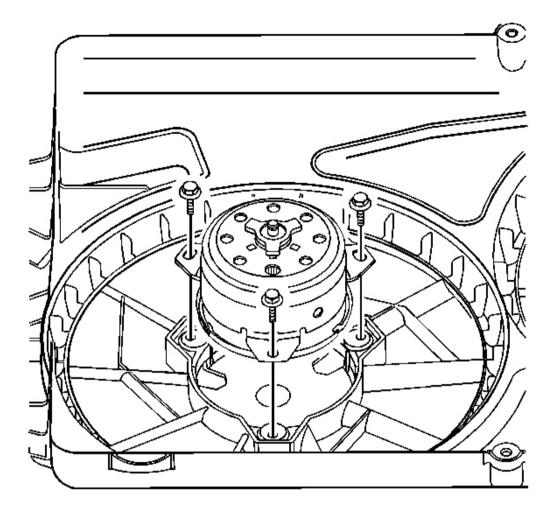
View Of Fan Motor Screws From The Fan Shroud Courtesy of GENERAL MOTORS CORP.
